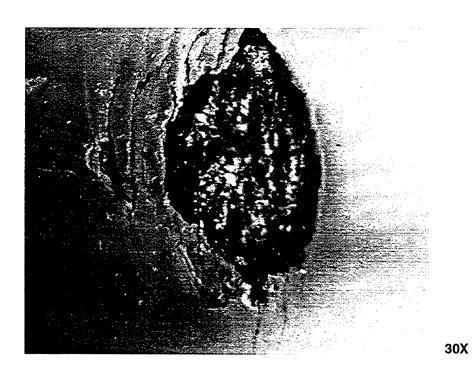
SEM Photo of GE TDC 24 Inner Ring Spall from MRC Round 1. TDC plated bearing, 876 hours, one of three plated bearing failures.
